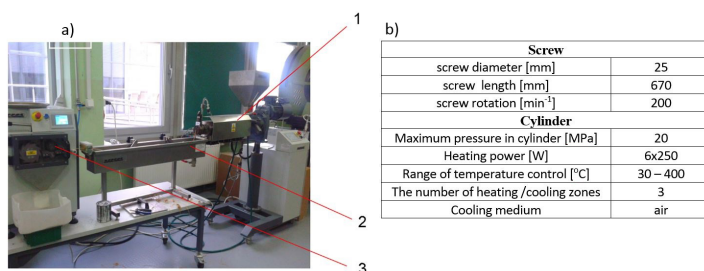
a) The test stand for extrusion of WPC pellets: 1- the extruder: Zamak EPH-25, 2- the cooling bath, 3 – the granulator; b) the technical data of extruder.
